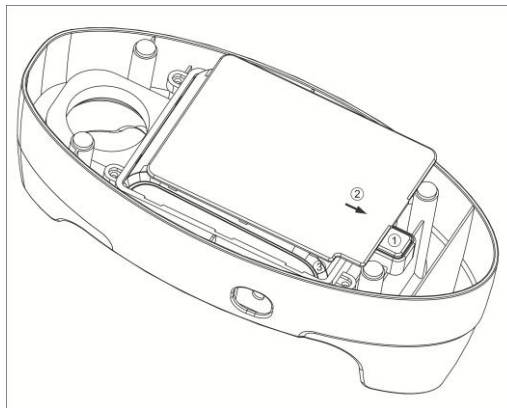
M2-W schematic diagram for the installation and disassembly of the printer
